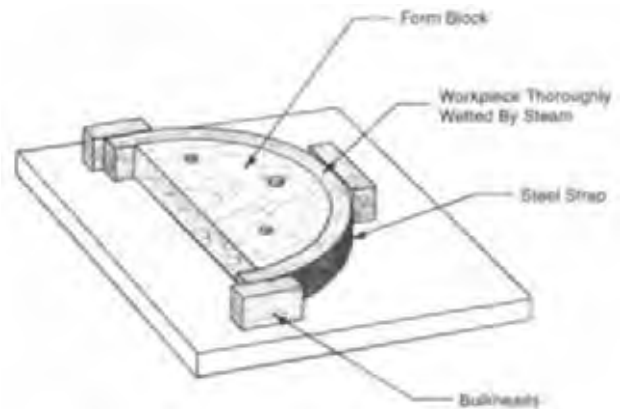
D1 Steam bending a solid wooden component. The steel strap applies compressive force to the outer layers of the workpiece, preventing stretching that would adversely affect the piece.
